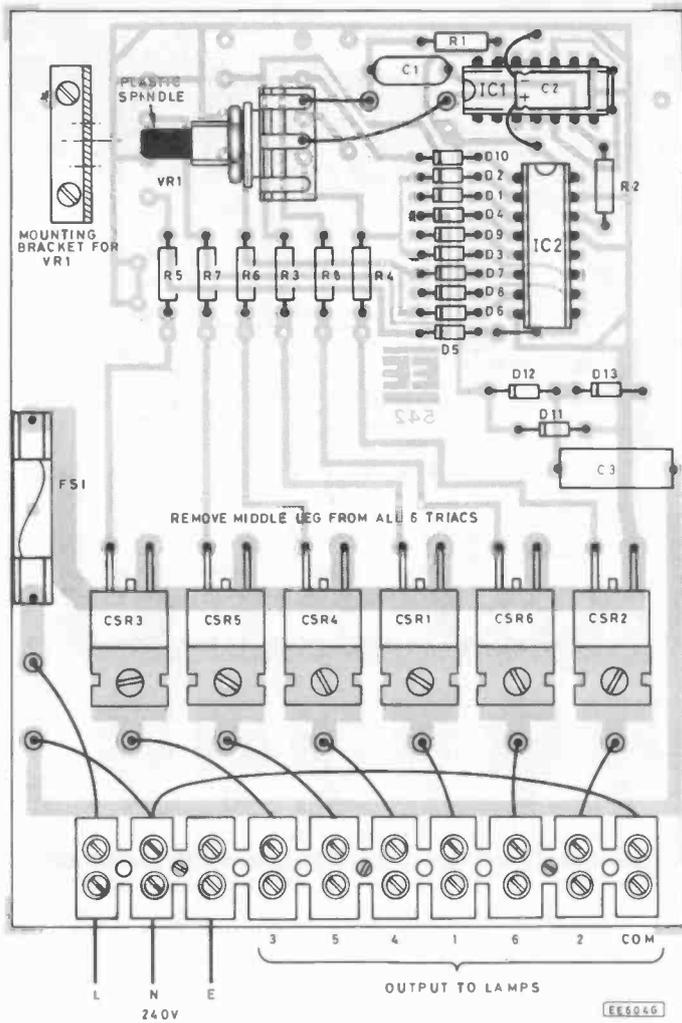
Component layout and interwiring for the Disco Lights. Note that this board must be housed in a PLASTIC case.
